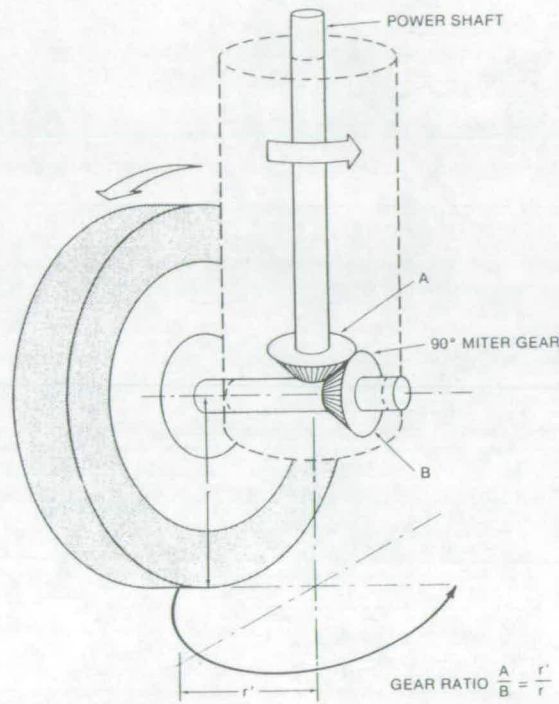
Steering action of the synchro drive and steering foot assembly
